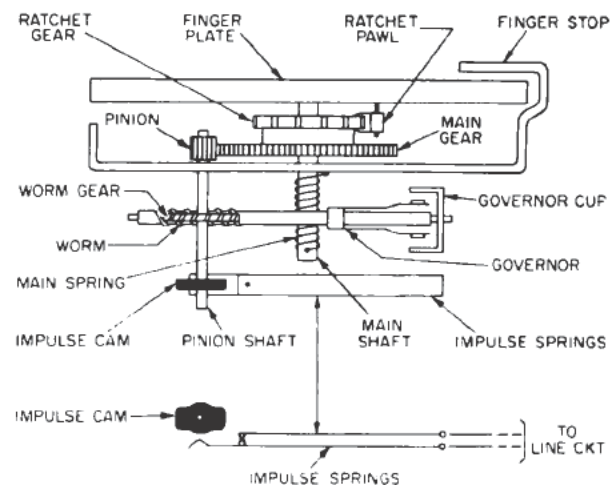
Telephone dial schematic (shunt cam, shunt spring assembly, and impulse shorting arm, not shown).
